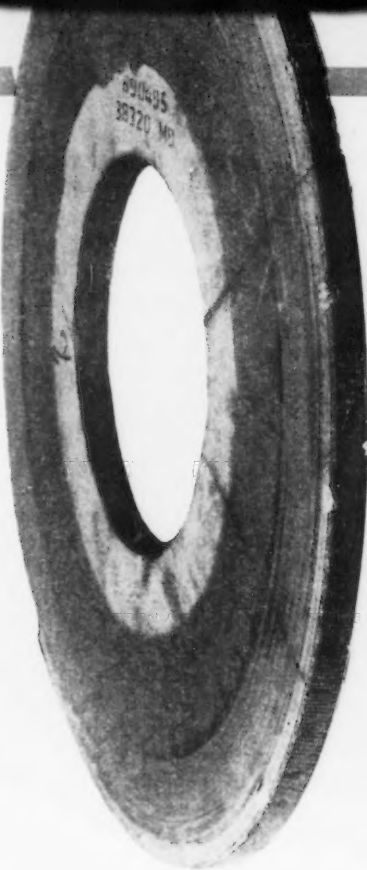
This crush formed wheel shows pitting on face and chipping at edges caused by improper roll location, lack of coolant or too rapid infeed.
